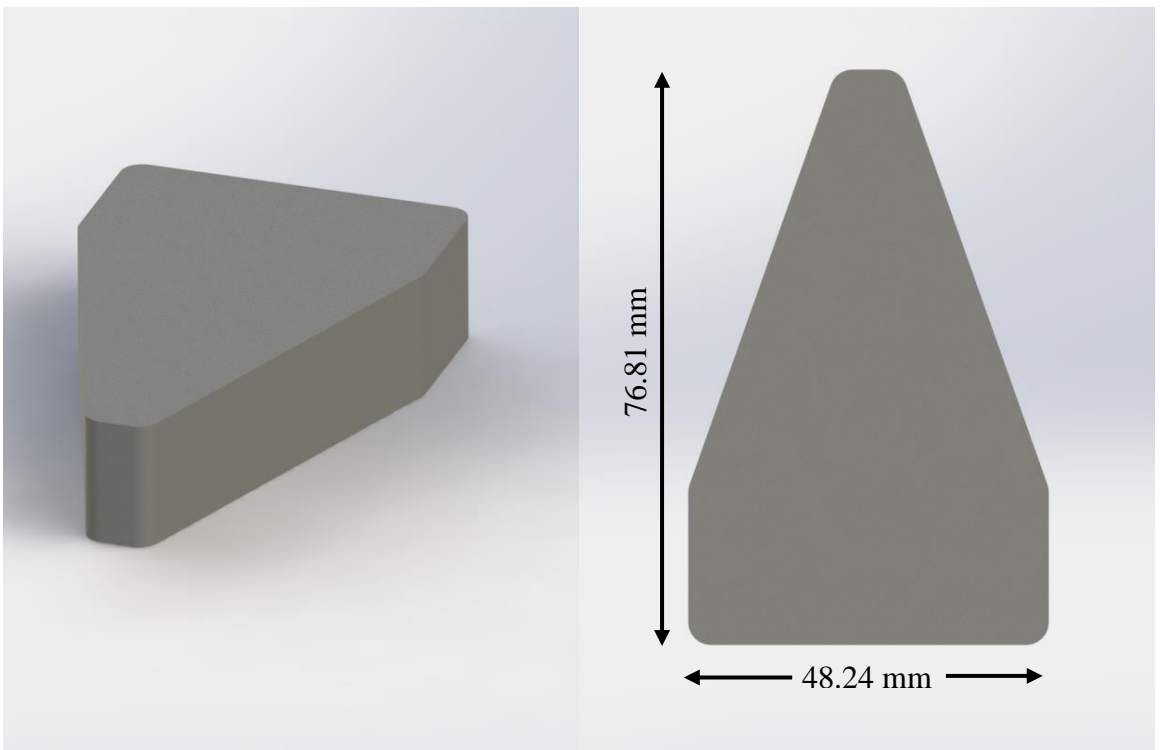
SolidWorks rendering of half-feed combine harvester top blade blanking punch
